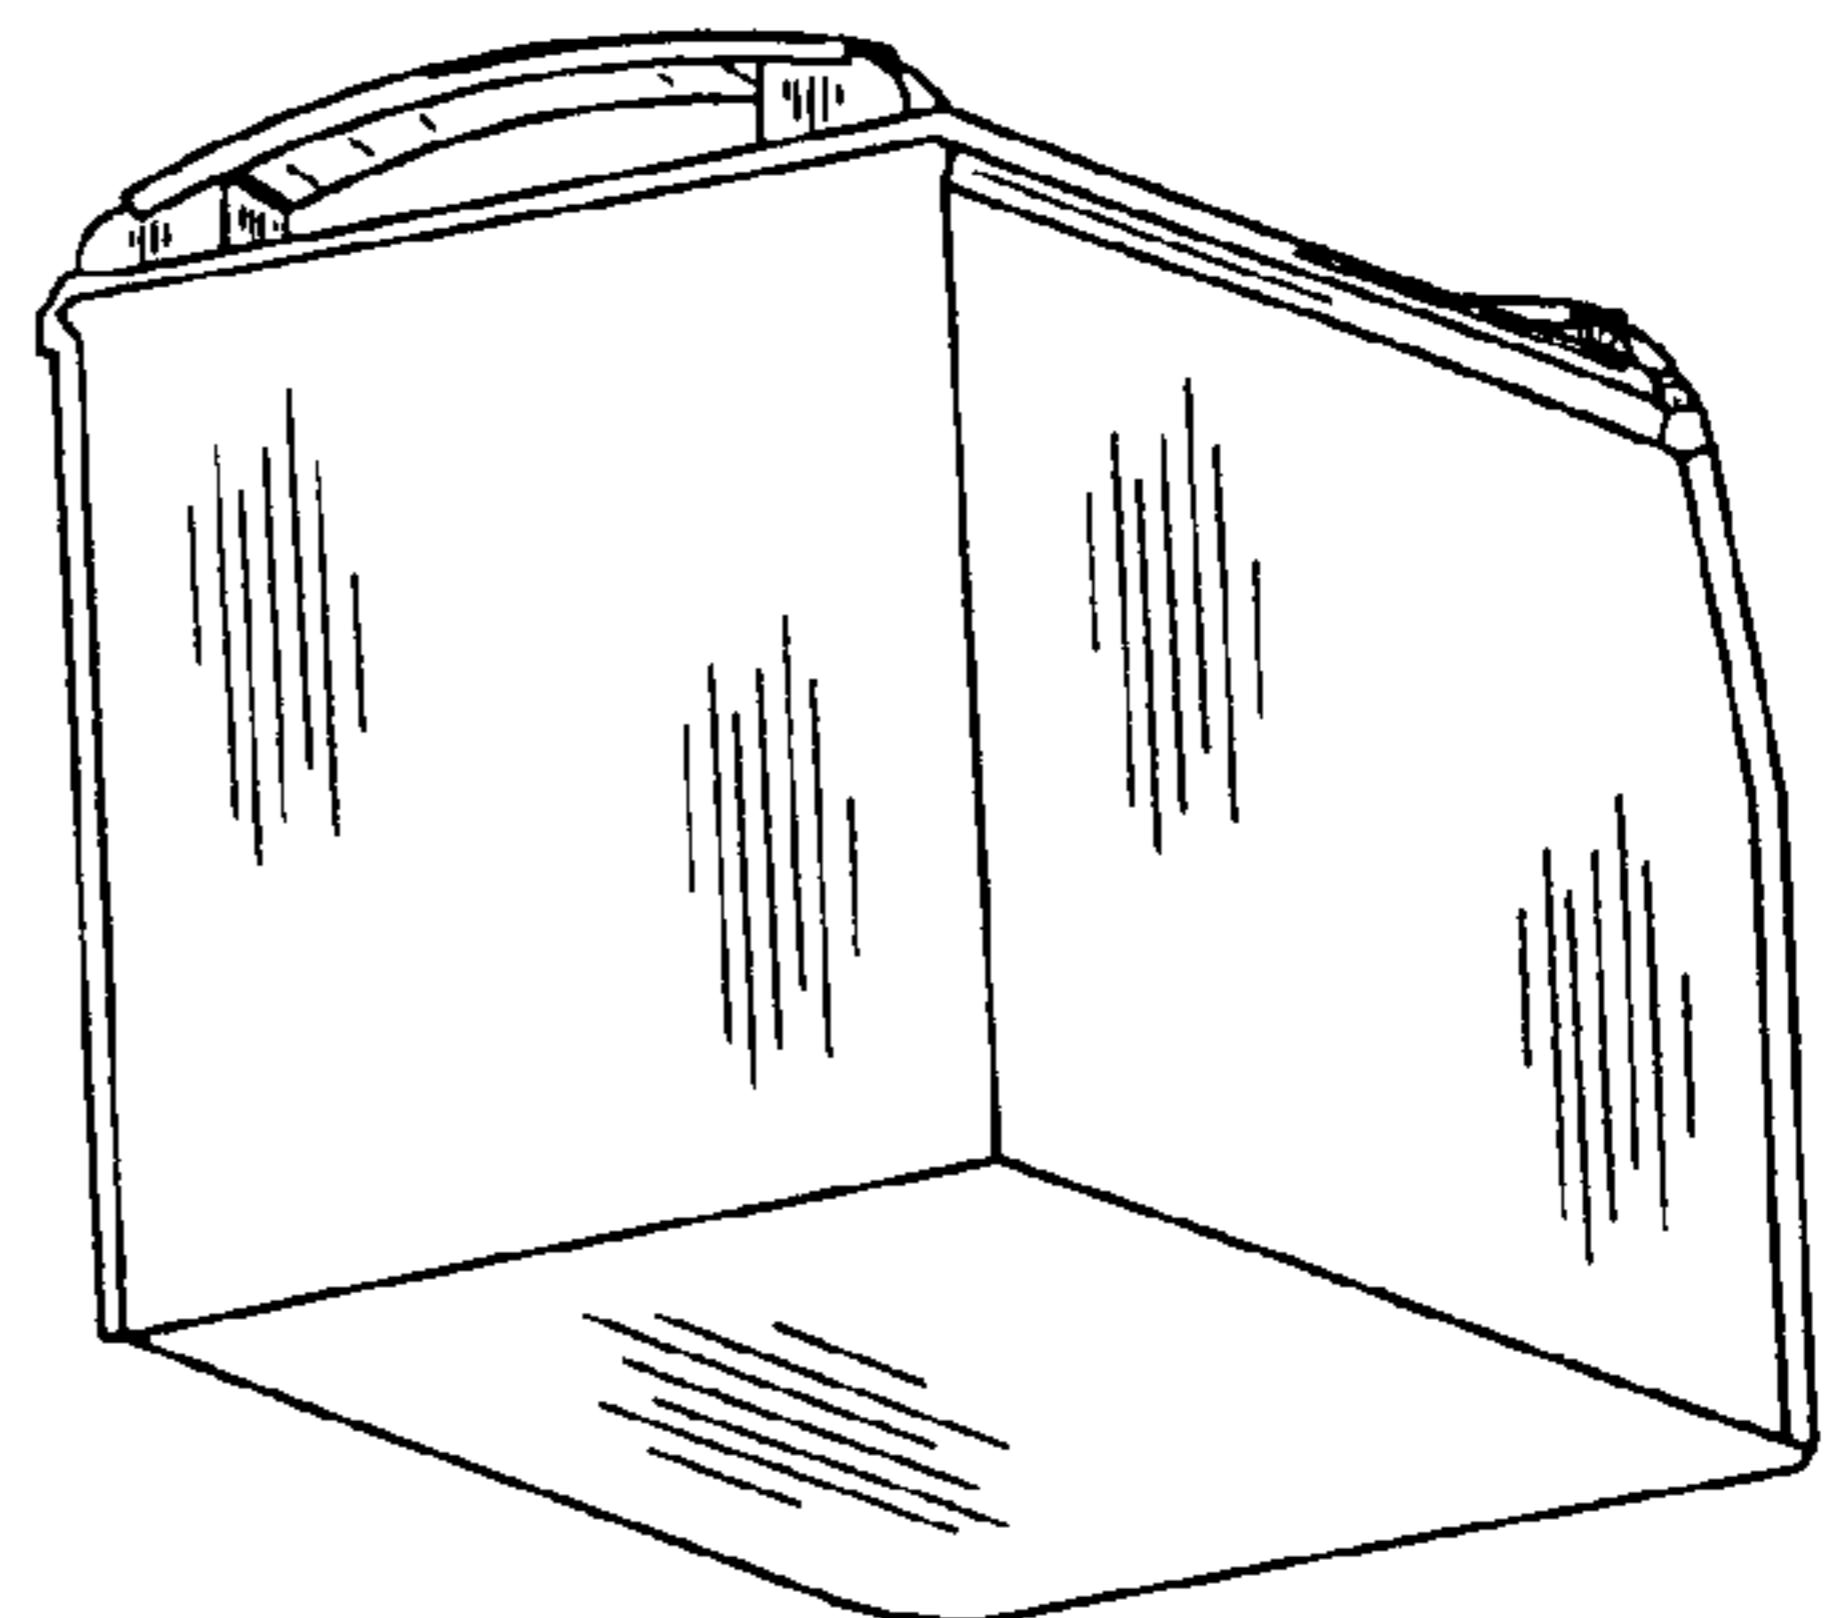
is a frontal perspective view of a variation of the third embodiment of a welding apparatus with a control panel shown in FIG. 19, with the control panel shown in broken lines; and,
